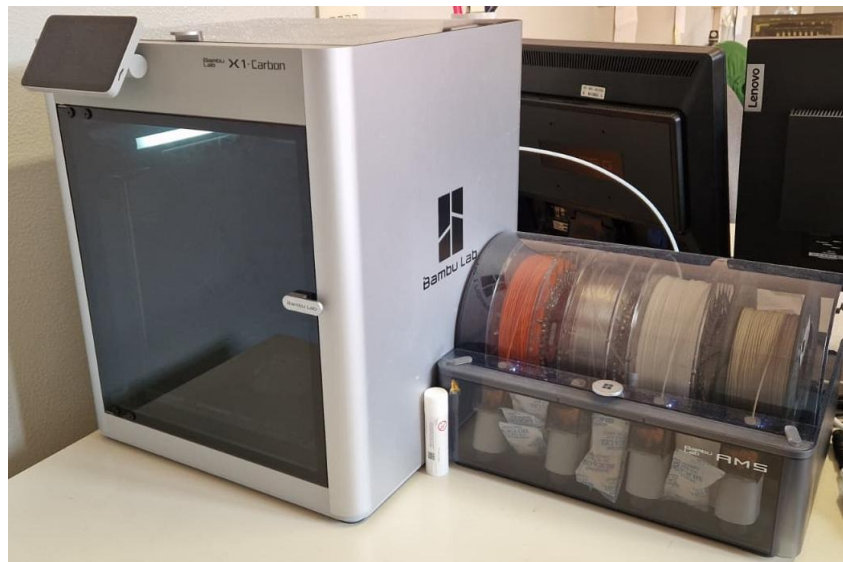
Bambu Lab X1 Carbon 3D printer used for cutting guide fabrication.
